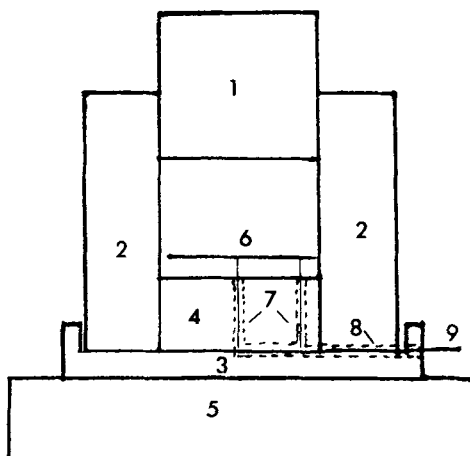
Cross-sectional view of PMMA punch and die assembly. 1) Top punch (shown raised for clarity), 2) Die, 3) PMMA punch and die assembly holder, 4) Bottom punch, 5) Bottom ram of Carver Press, 6) Tungsten wire sensor (planar coil), 7) Bottom punch exit ports, 8) Die and holder exit ports for wire, 9) Shielded four wire cable to DMM.
